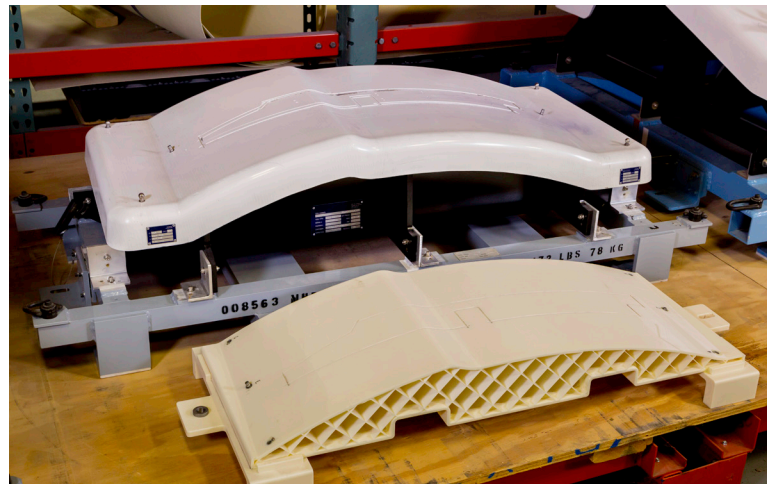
View of the FRP machining fixture (top) next to the FDM machining fixture (bottom).
